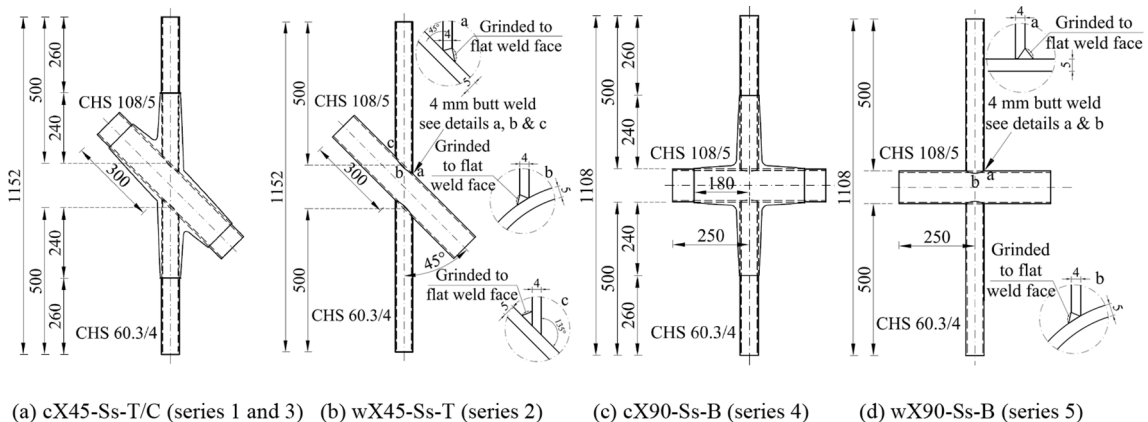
Geometry of 45°/90° small-scale wrapped composite and welded X joint specimens for tensile/compressive/bending tests.
